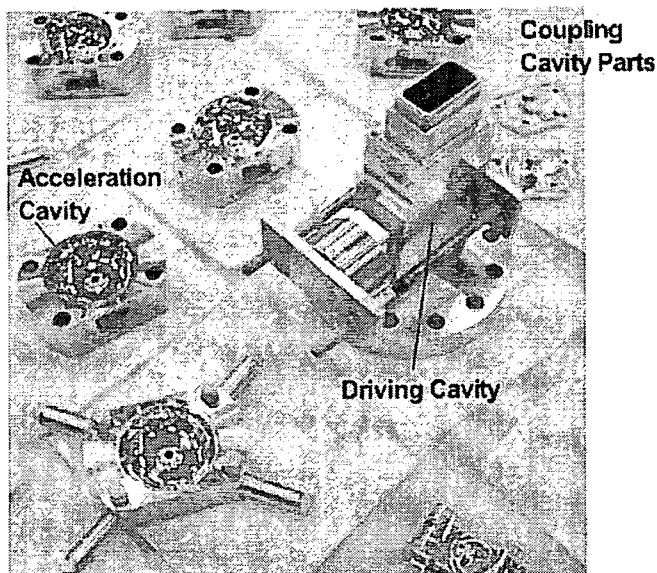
The cavity parts are made of oxygen-free high conductivity copper (ASTM F68 Class 1) and the inner surfaces are machined with an ultraprecision lathe.
